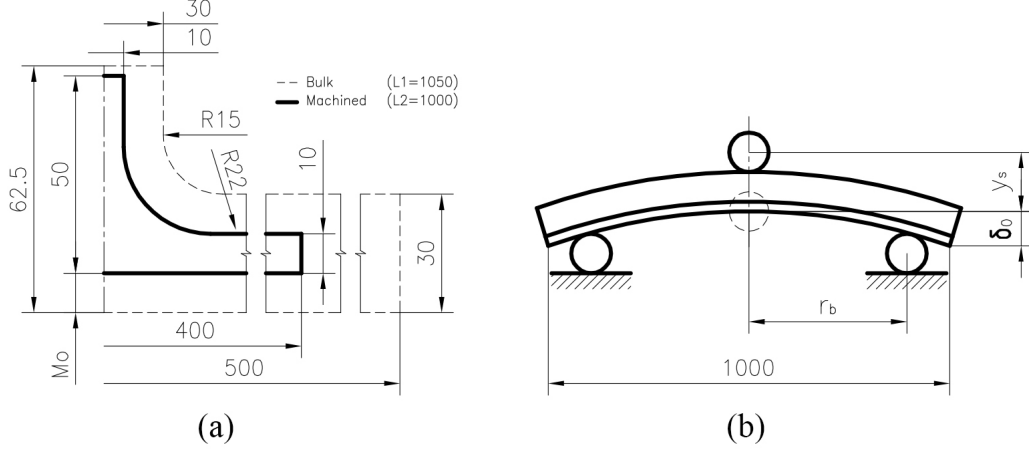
T shaped beam. a) Geometry definition and b) Parameters representation for three-point bending straightening.
